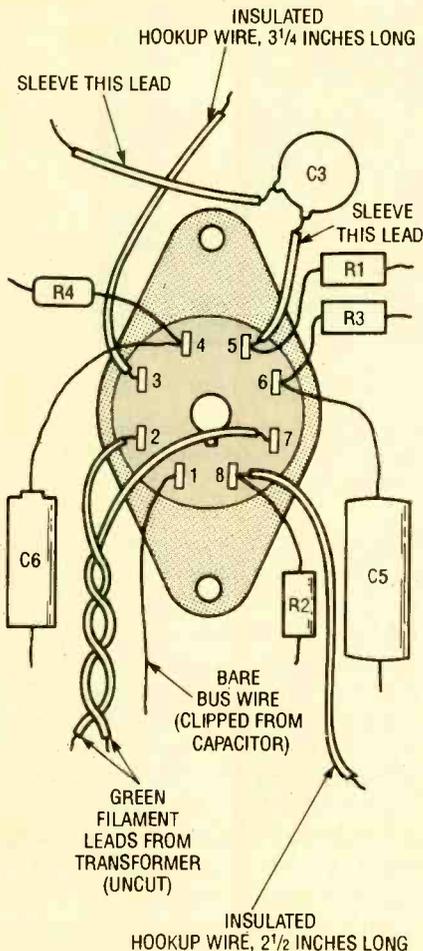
Before mounting the tube socket on the board, wire C3, C5, C6, R1-R4, and the three connecting wires to the socket.
